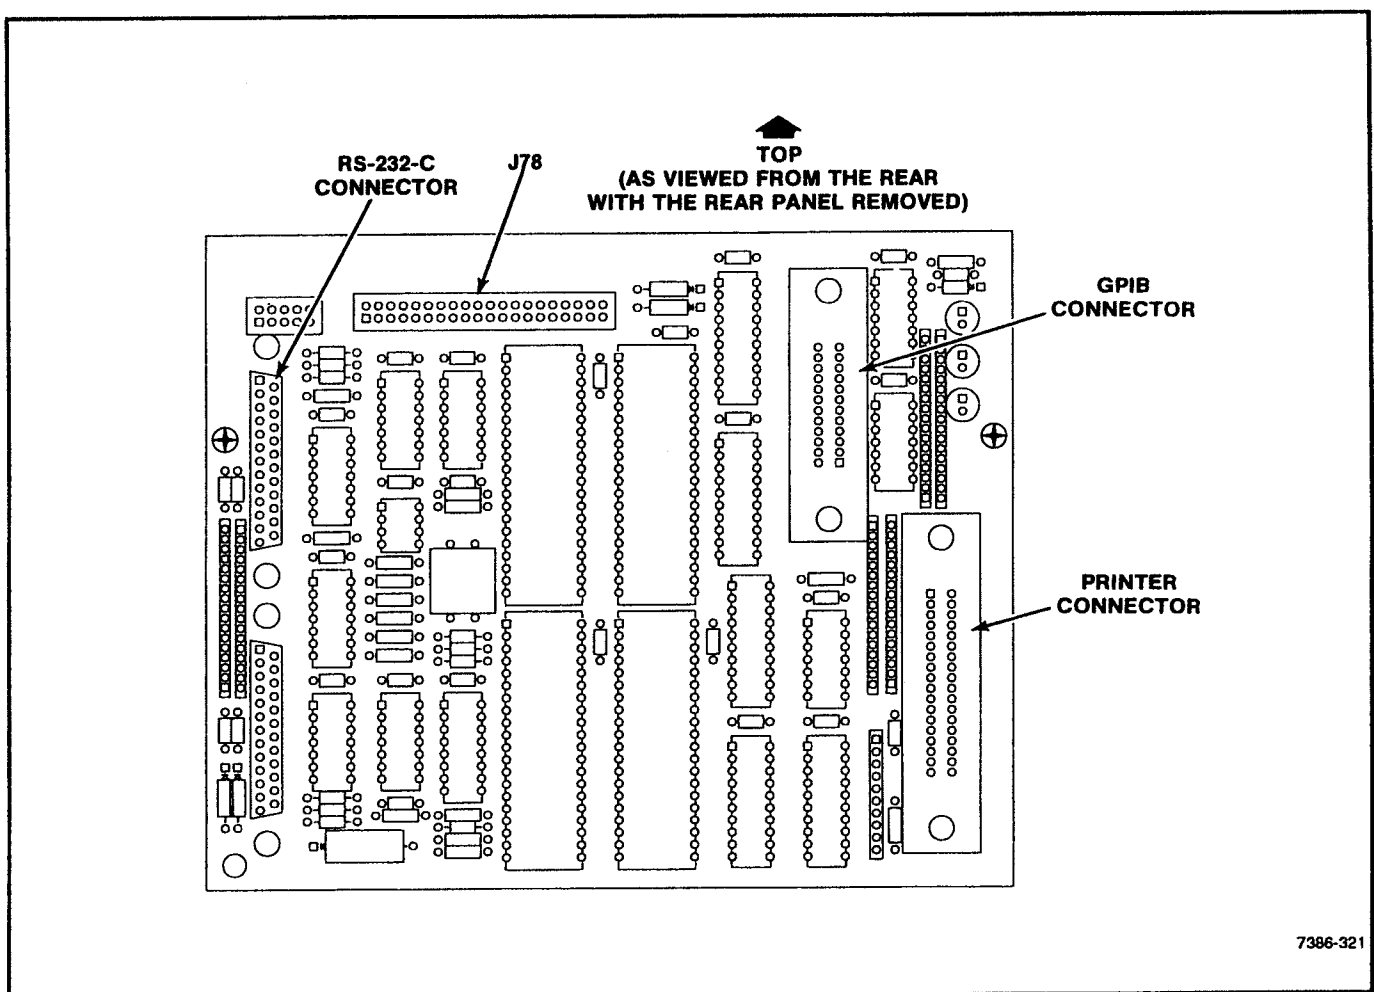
Connector locations for removal of the A12 Rear Panel board.
